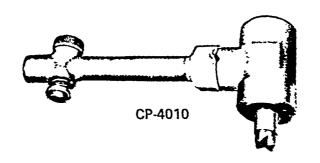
Die Grinder Accessories by Chicago Pneumatic Tool.
